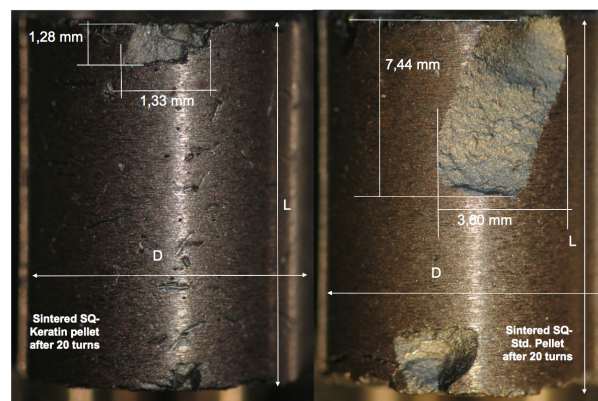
Sintered pellets after 20 turns showing chips dimensions.
